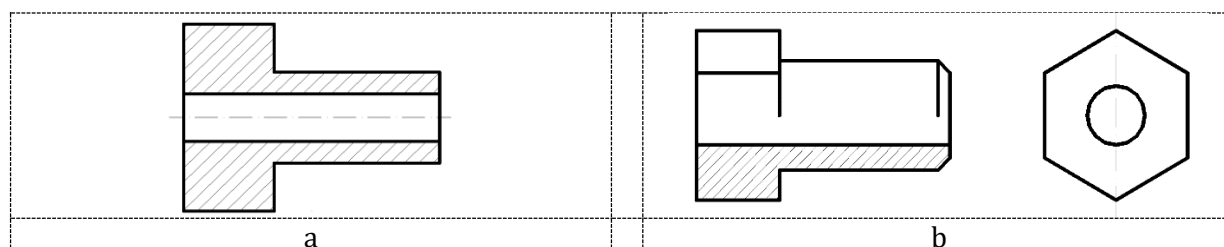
Stage of abstract conceptualization- parts with internal features- (a) the part is drawn in one projection- section; (b) the part is drawn in two projections, half-sectional view and left-hand view
